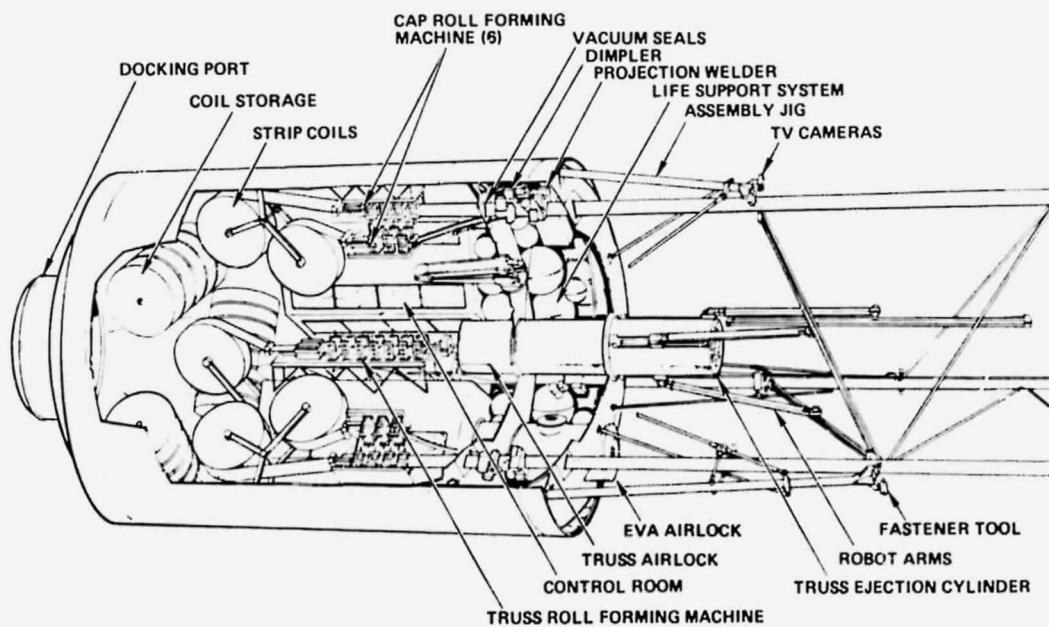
Production Prototype 10-Meter Truss Fabrication and Assembly Module
